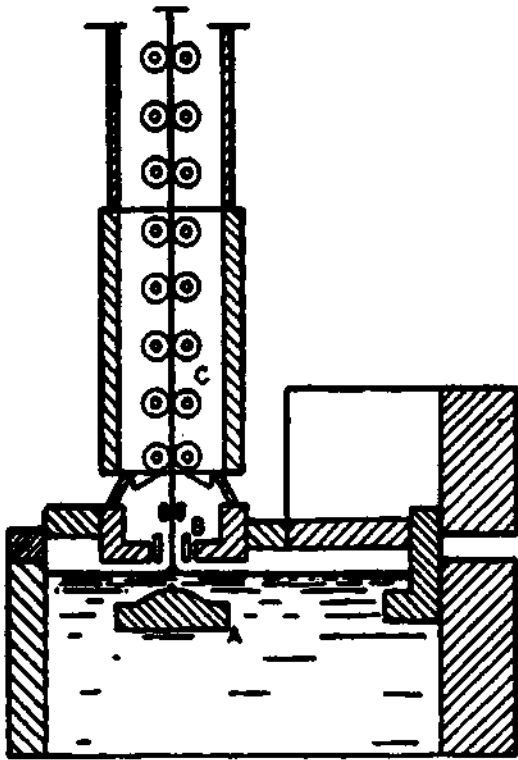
A3d The Pittsburgh process for drawing flat sheet glass: A - drawbar submerged in molten glass, B - sheet coolers, C - vertical drawing and lehr area. (Courtesy PPG Industries Corp.)
